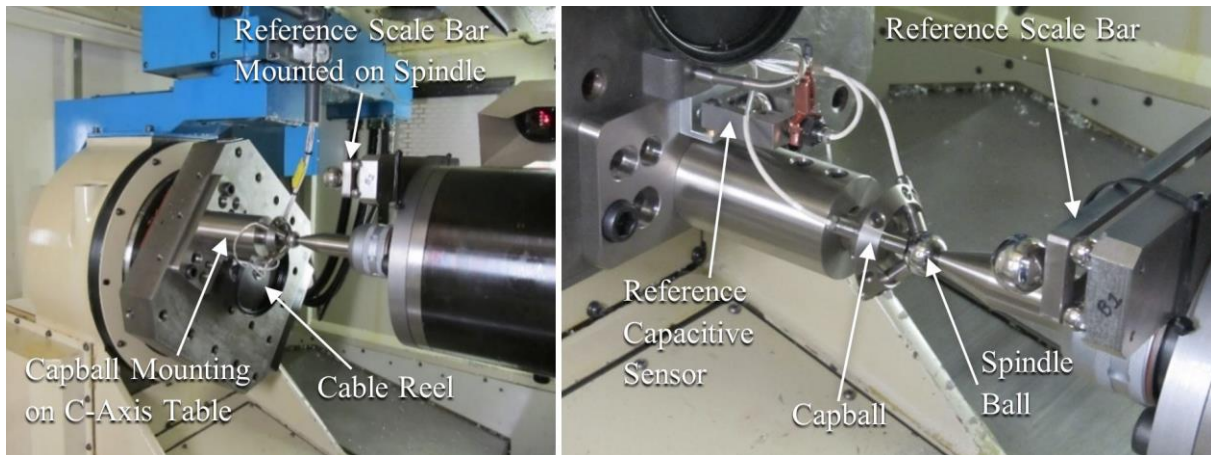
Capball device probing the spindle ball on the HU40-T machine
